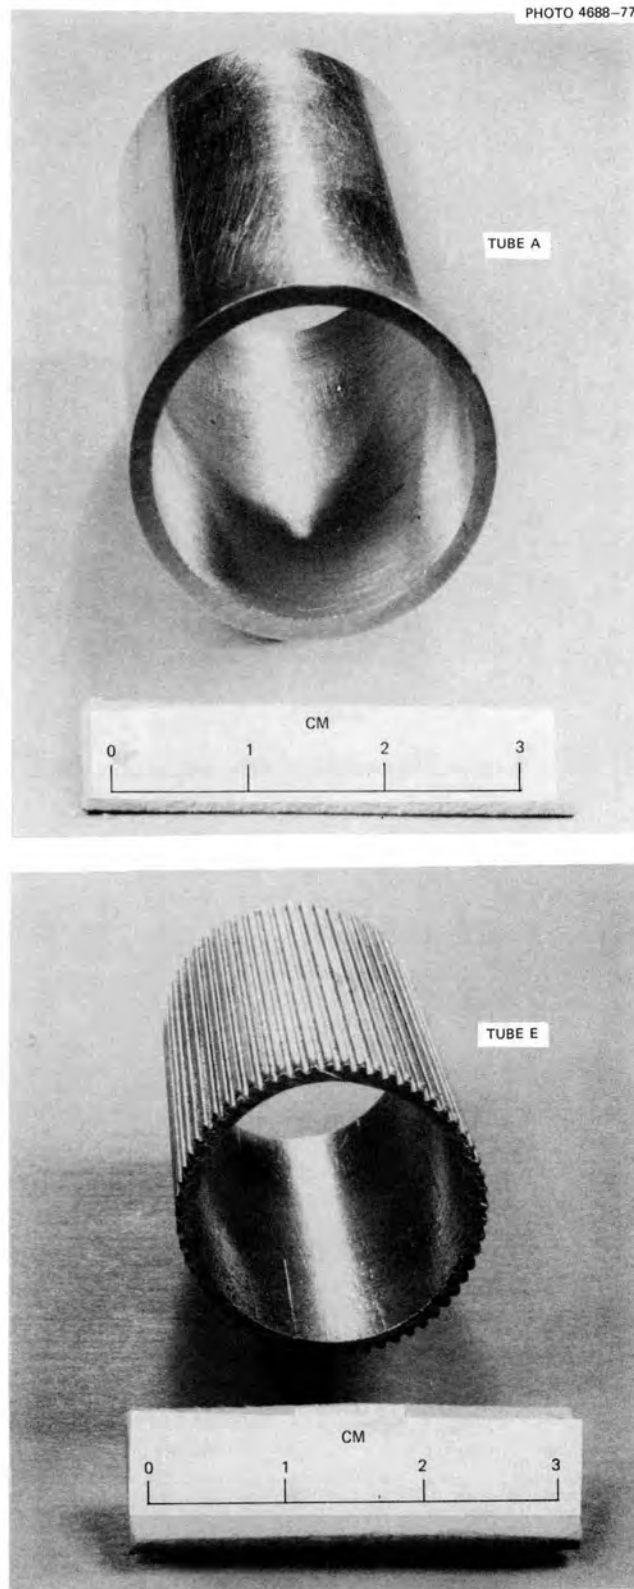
Photographs of tube samples — Tubes A and E.
